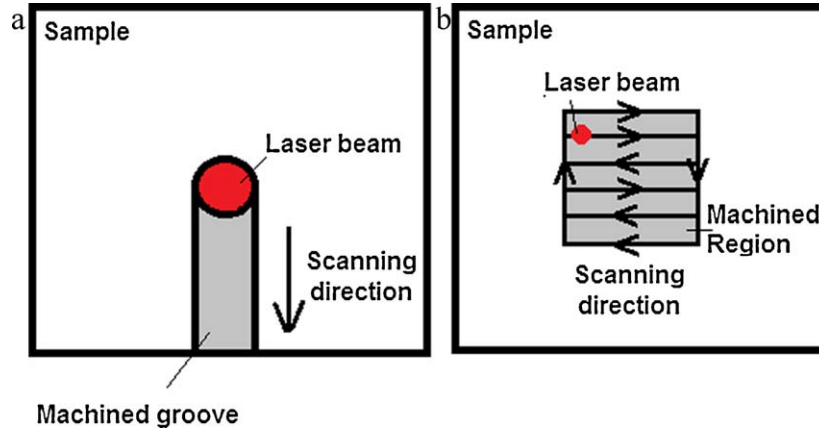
The machining modes using in this work. (a) Straight line grooves by multi-pass scanning and (b) laser milling of rectangular cavities.
